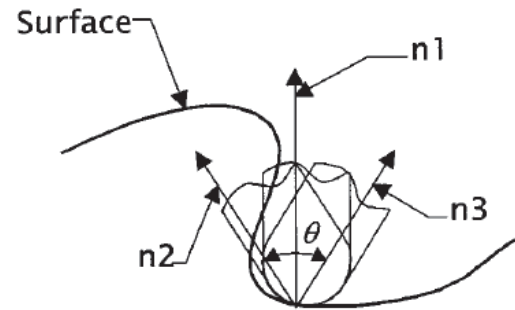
Finding a collision-free tool position by moving the tool along a cone
